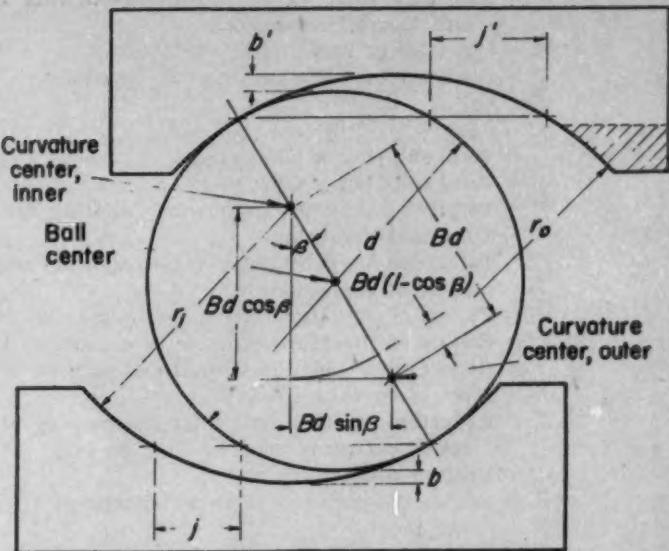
Above—Geometry of the conventional angular-contact ball bearing
